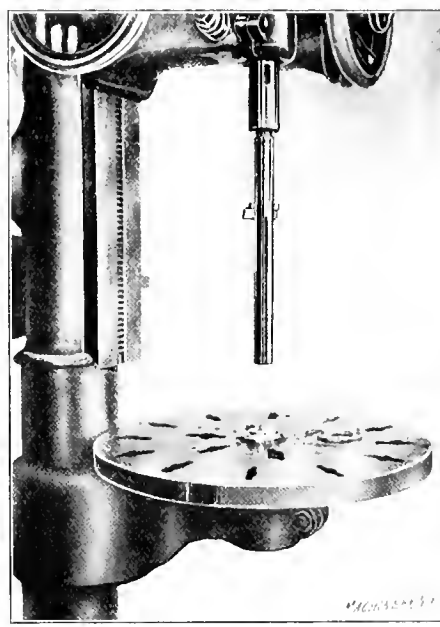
Method of Guiding the Boring-bar while boring Drill Press Base.
